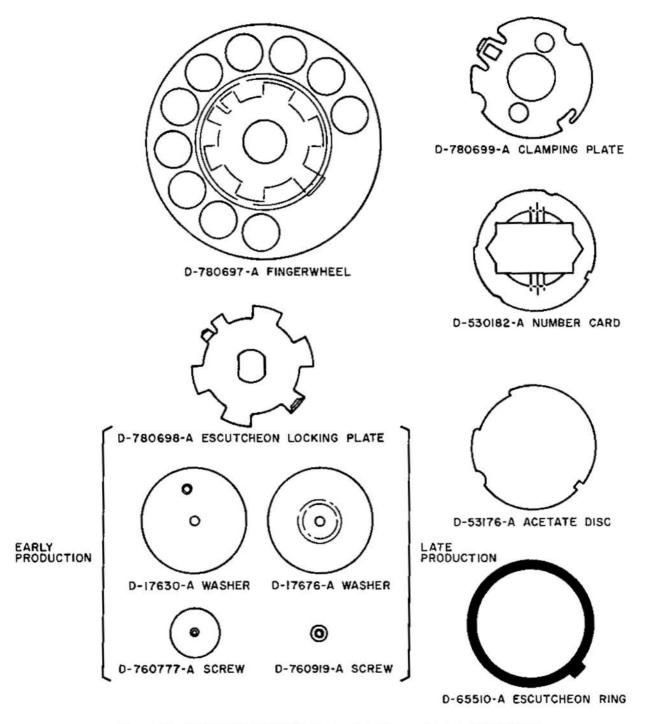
GTE AE D-780697-A Acrylic Fingerwheel and Assembly.
